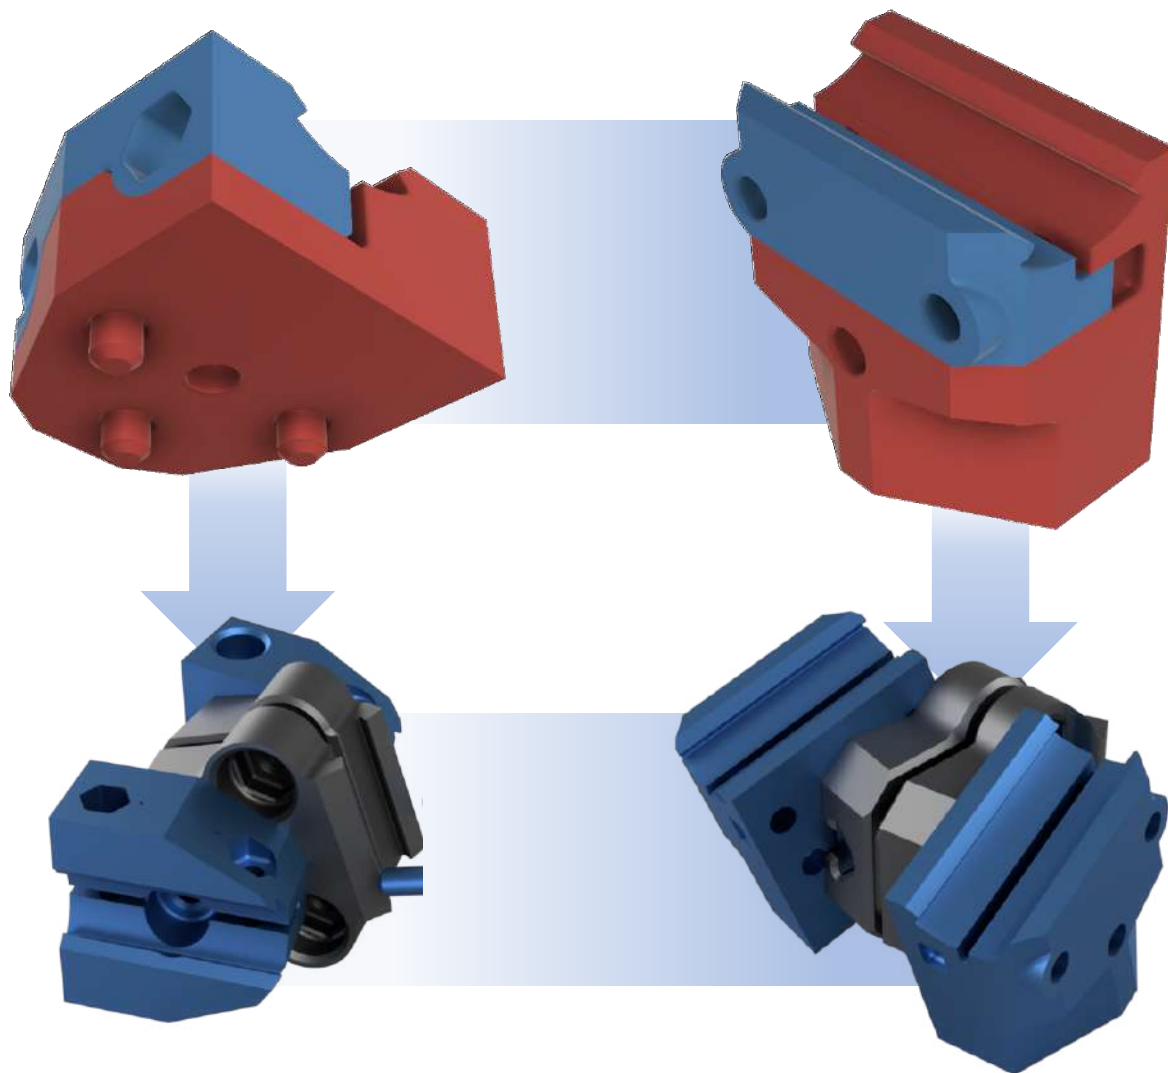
REAR STAY ATTACHMENT DEVELOPMENT
